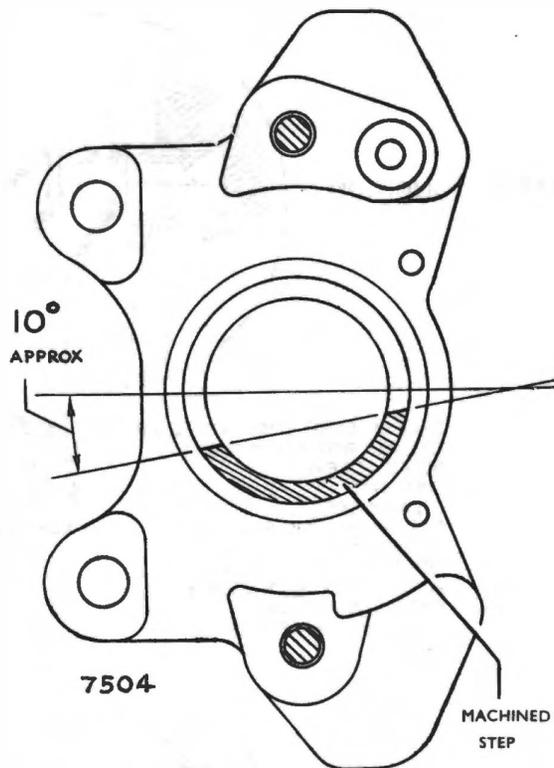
A SECTION THROUGH THE BRAKE CALIPER SHOWING THE CORRECT LOCATION OF THE ANTI-SQUEAK STEPS, MACHINED ON THE OUTER ENDS OF THE PISTONS, WHICH MUST BE POSITIONED TOWARDS THE BOTTOM OF THE APERTURE IN THE REAR OF THE BRAKE CALIPER.
